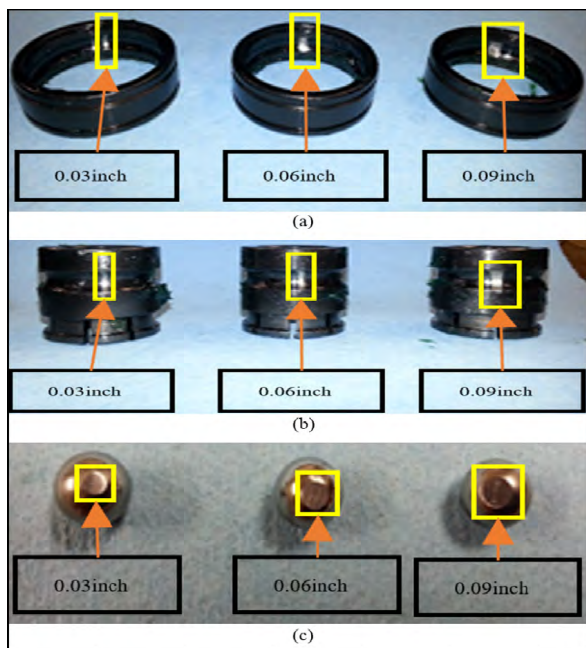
Bearing samples used in the experiment: a) outer race defect, b) inner race defect, and c) ball defect.
